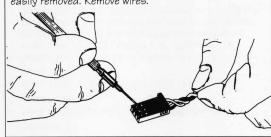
With a small flat-head screwdriver, press on each of the three metal prongs until the wires are easily removed. Remove wires.
